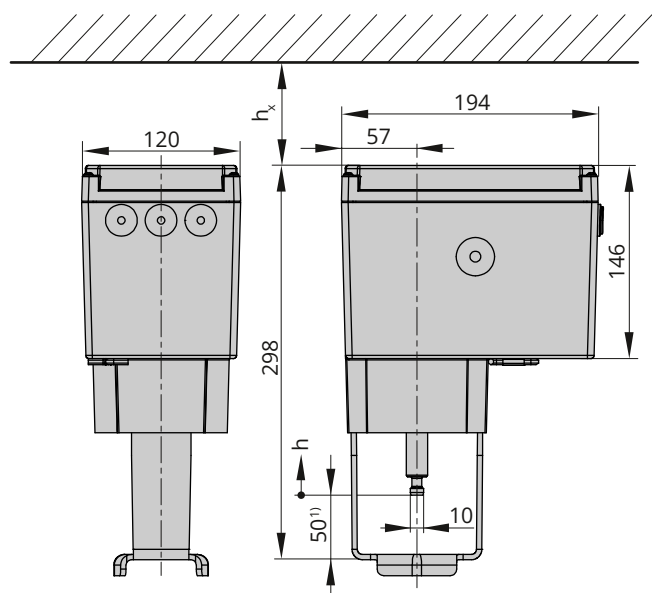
Dimensions in mm · Type 3374-10, -11, -21 and -31 (form B)
